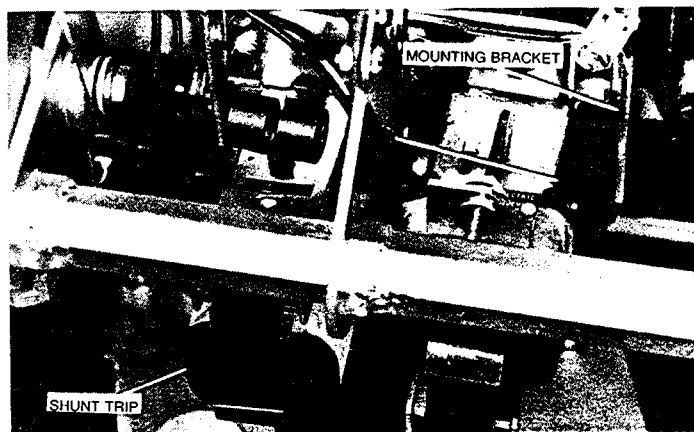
SHUNT TRIP AND UNDERVOLTAGE MOUNTING
